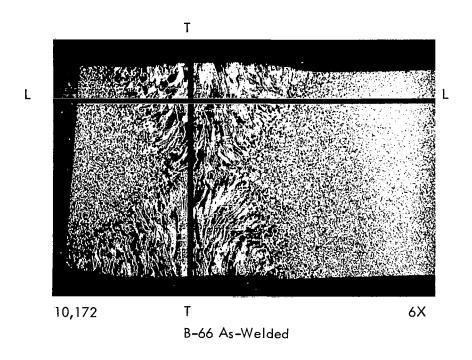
B-66 Sheet Butt Weld Microstructure
